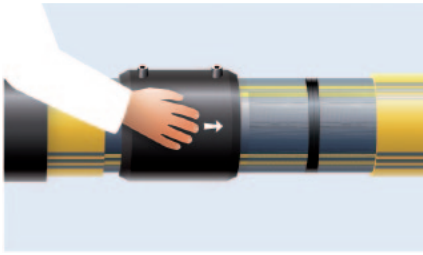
Sliding the electrofusion coupler centrally over the bead-free butt joint
